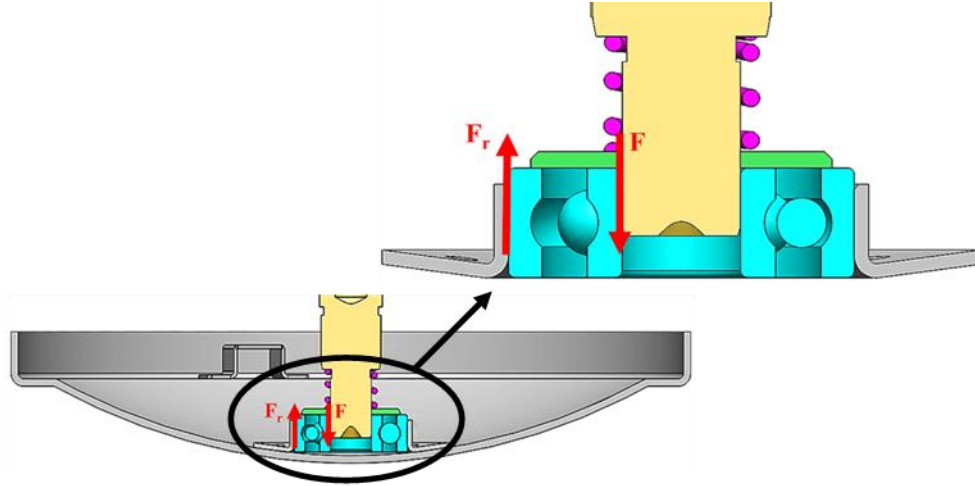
Shear force (F_r) acting on the inner surface of lower bearing housing as a reaction of force due to spring on the lower bearing
